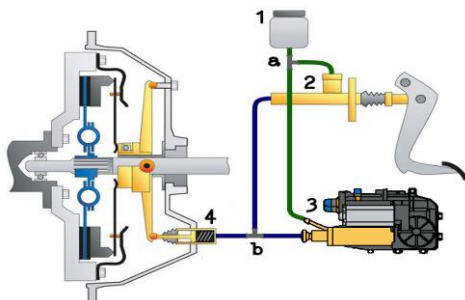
Hydraulic system, 1- fluid reservoir, 2- master clutch cylinder, 3- electromechanical clutch roller, 4- auxiliary clutch cylinder, a-b- parallel connection to the original system
